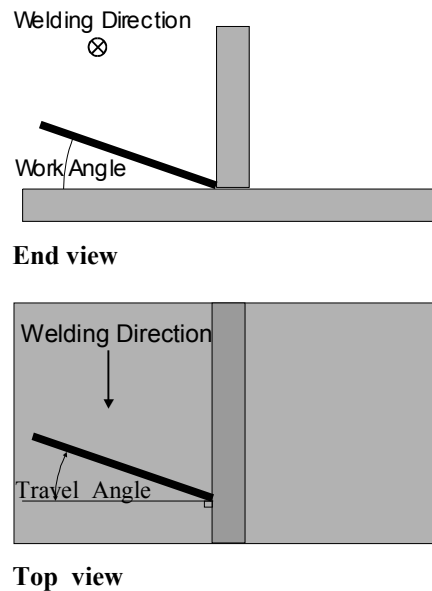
Work angle and travel angle for laser beam, welding wire and plasma control gas, respectively.
